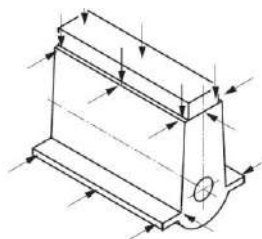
Measuring points for reciprocating engines close to the bearing locations
